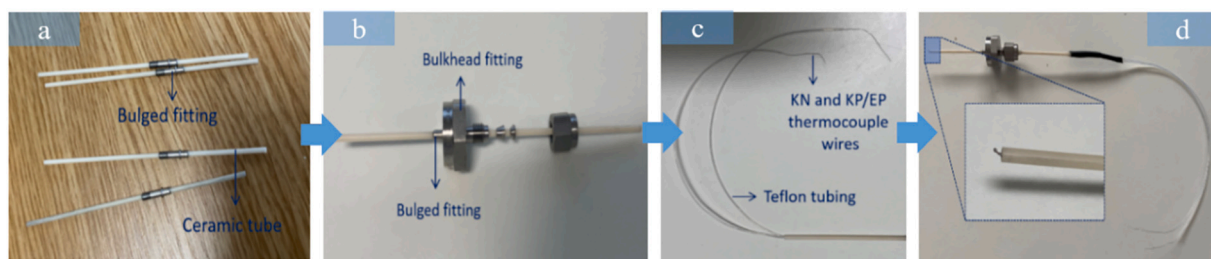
Research thermocouple fabrication process. (a) Assembly of bulged fitting on a ceramic tube, (b) assembly of bulkhead and bulged fittings, (c) insertion of thermocouple wires into ceramic tube and covered with Teflon tubing, (d) welding of thermocouple wires.
